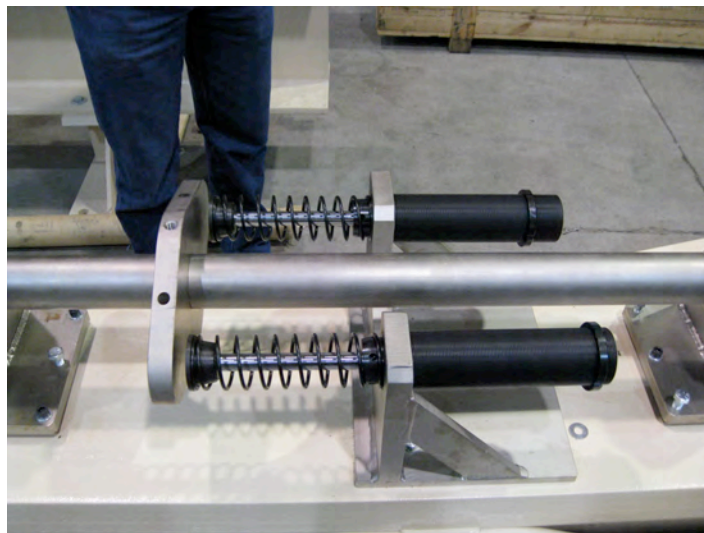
Photograph showing the simple recoil system used on the DEMII gun assembly.
